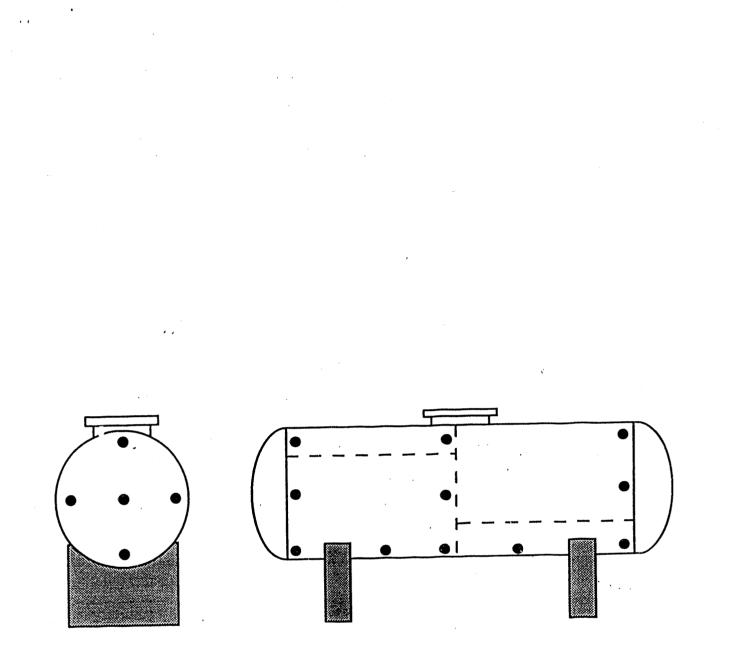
Typical Horizontal Storage Tank Mounted on Concrete Supports
